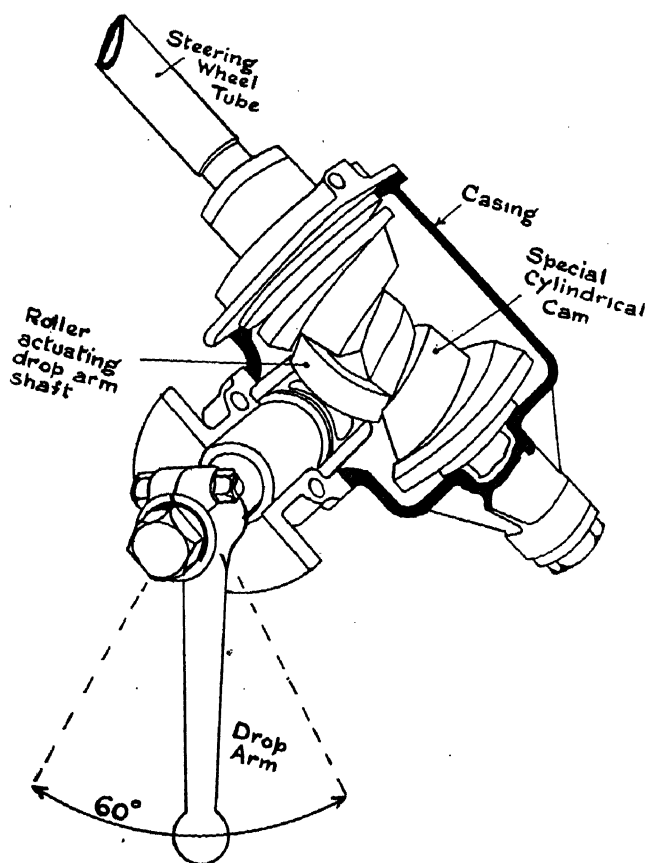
Marles Type of Cam and Roller Steering Gear.
